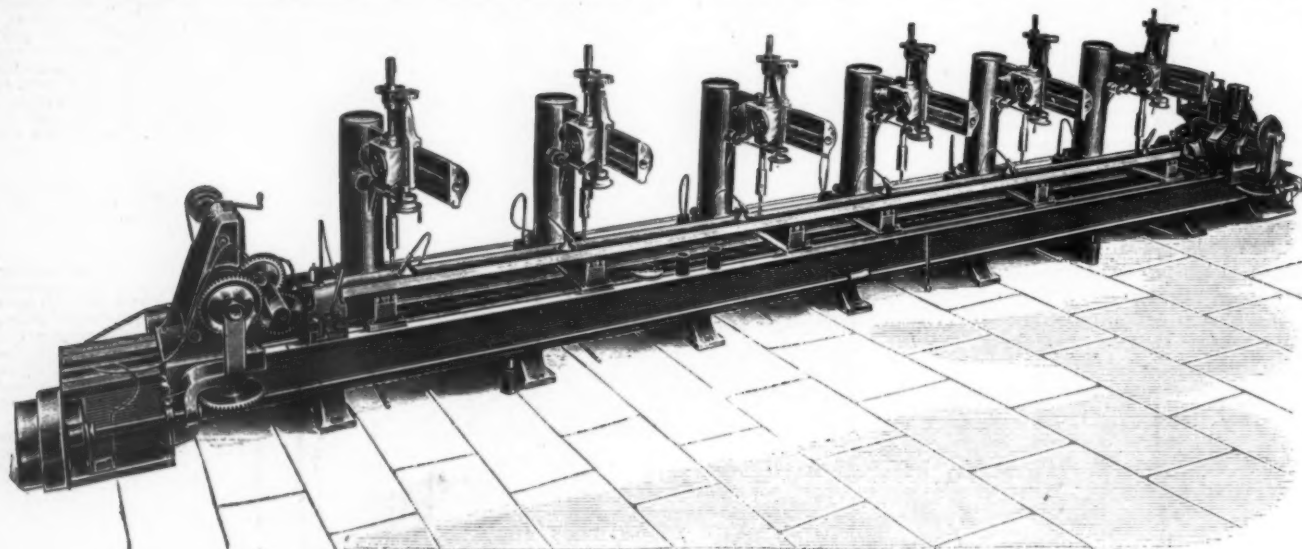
MACHINE FOR MILLING AND DRILLING SOLE BARS
